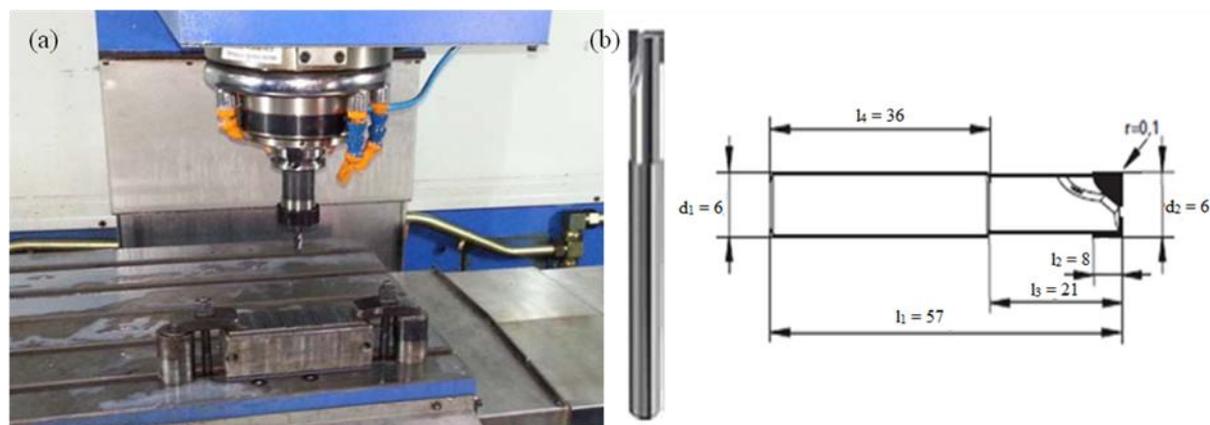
(a) Universal milling machine (b) PCD coated tool
